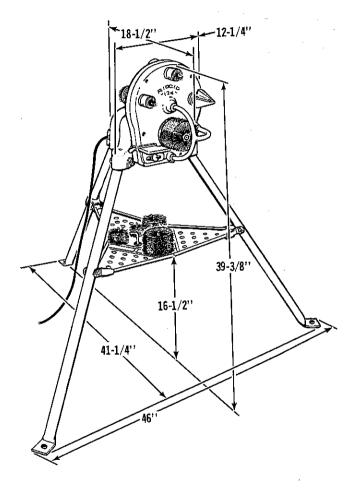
No. 124 Copper Cleaning Machine Dimensions.
